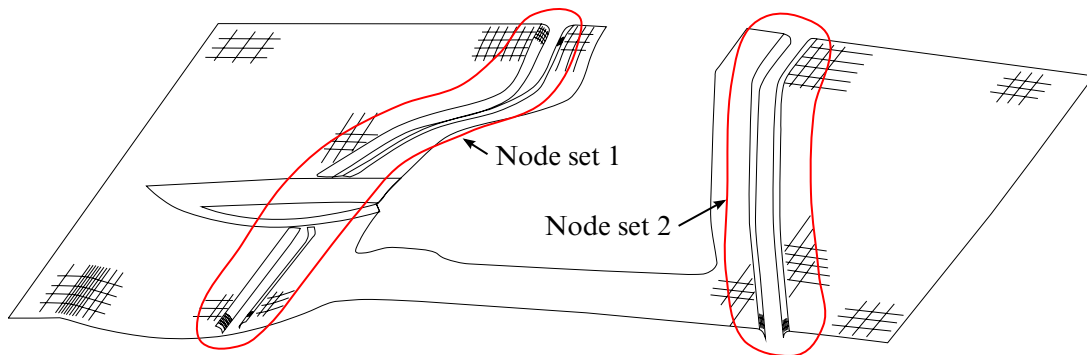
Trim die compensation with drawn panel springback shape.
